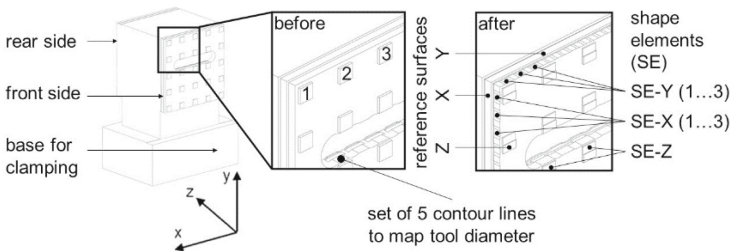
Test work piece with ref. Surfaces and shape elements before and after measurements
